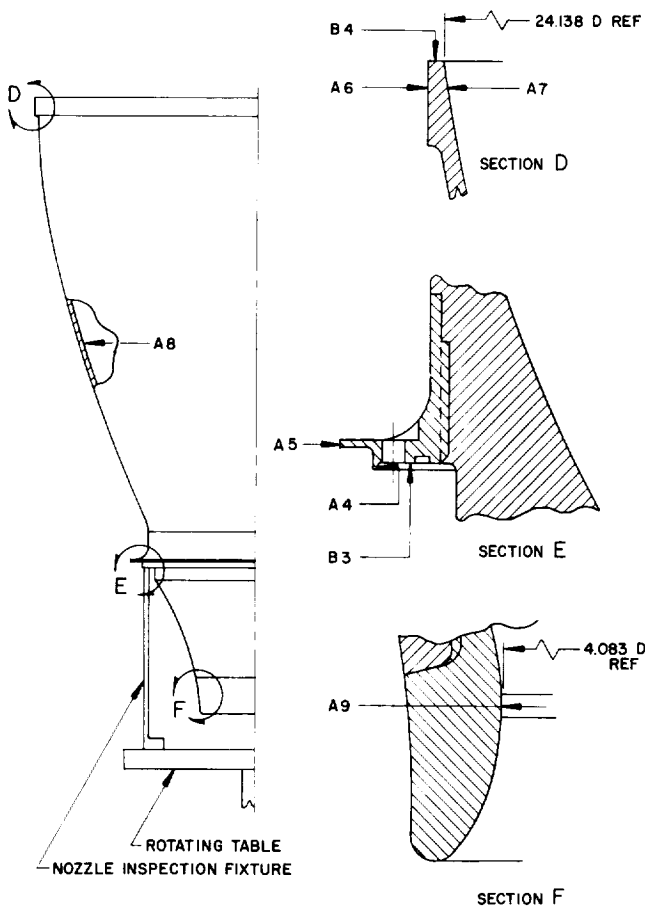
ATS apogee motor nozzle alignment inspection positions
